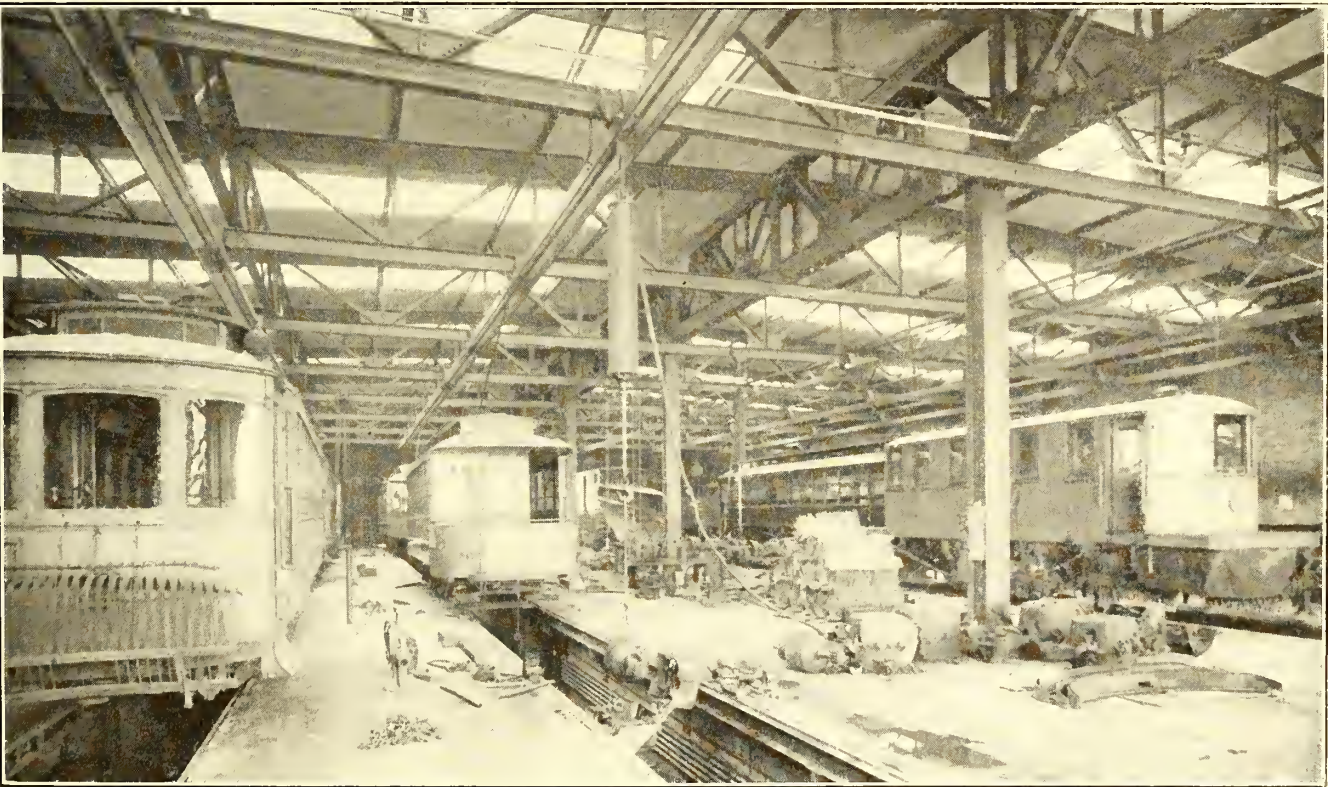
Syracuse Shops—View in Truck Shop, Showing the Storage Aisle Between the Light and Heavy Overhauling Sections
